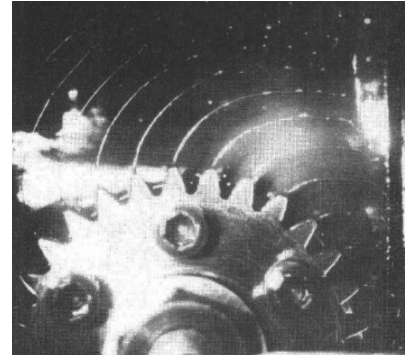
Fling-off cooling in rotating spur gears [102]
